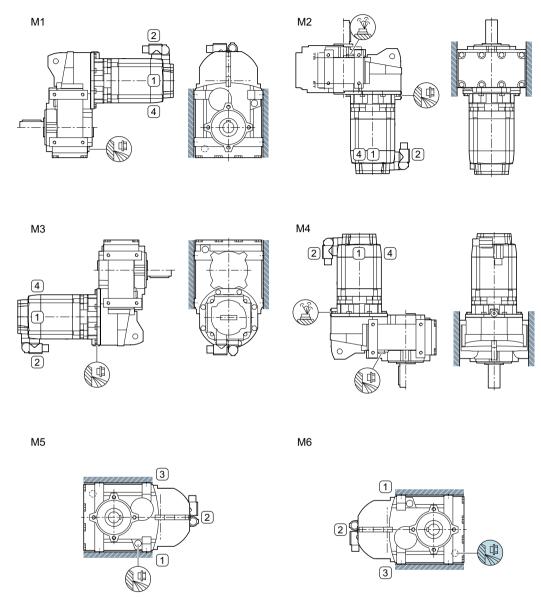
Mounting positions for servo parallel shaft geared motors FZ and FD, foot-mounted design, frame size 29, 2 stage and 3 stage
